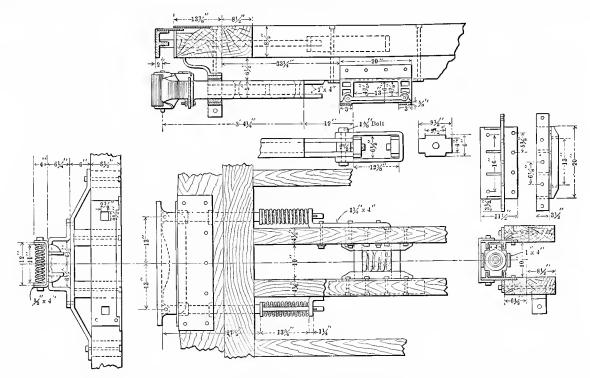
National Platform and Buffer with Hinson Single Spring Draft Gear for Cars with Wooden Draft Sills. National Car Coupler Company.
